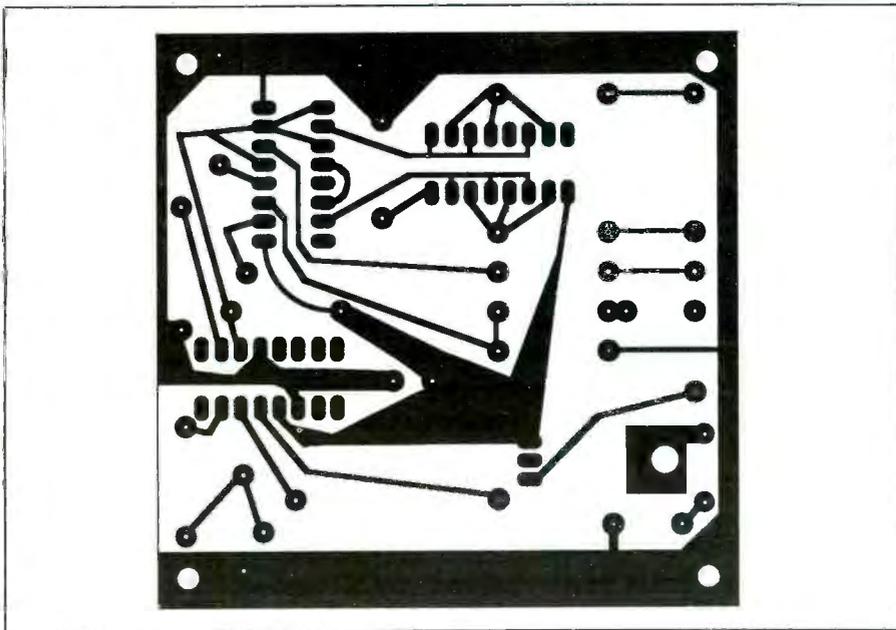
Actual-size etching-and-drilling guide for project's printed-circuit board.
